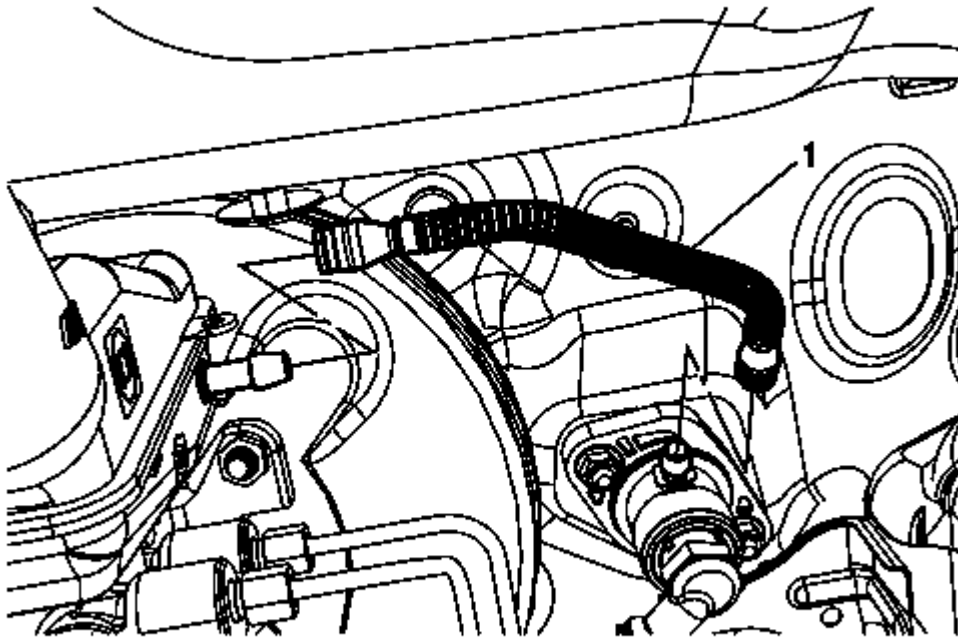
Clutch Master Cylinder Reservoir Hose Assembly
